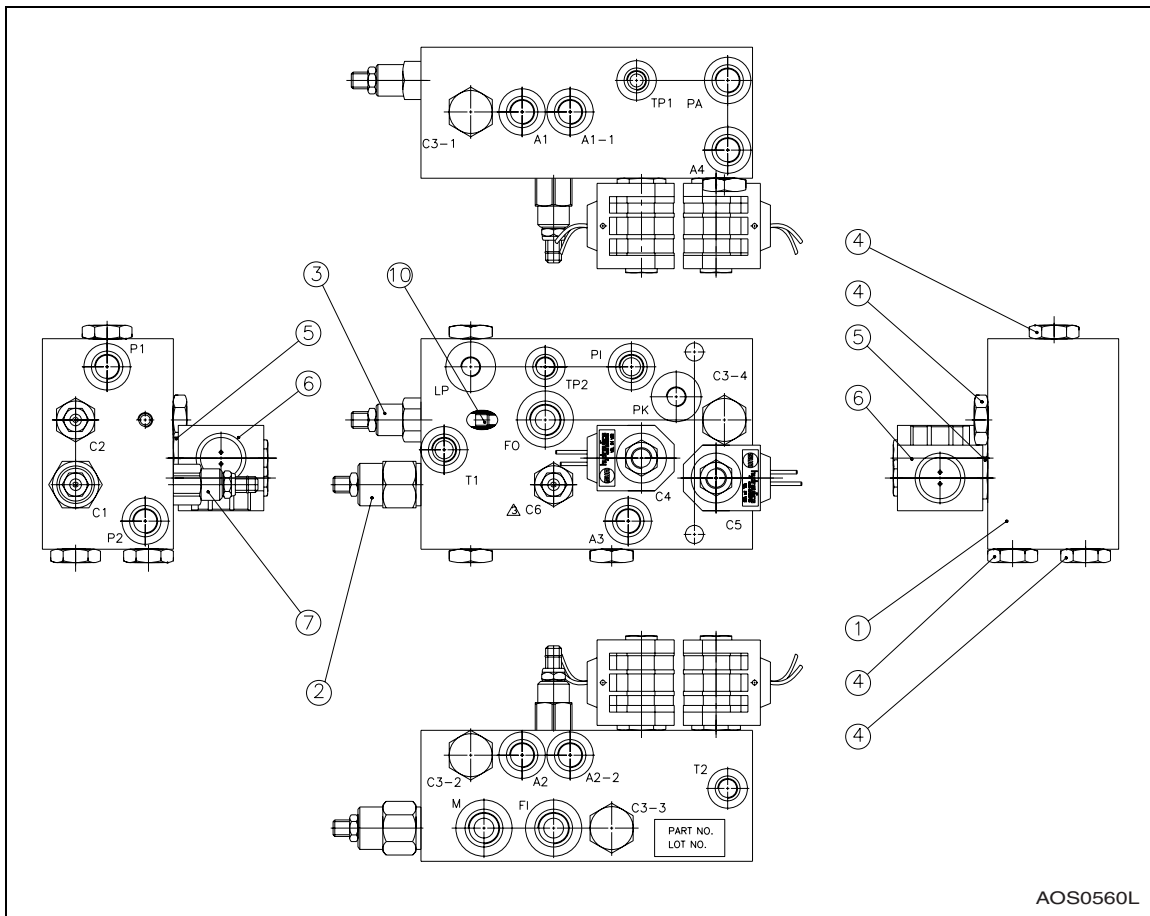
BRAKE & FAN MOTOR SUPPLY VALVE
